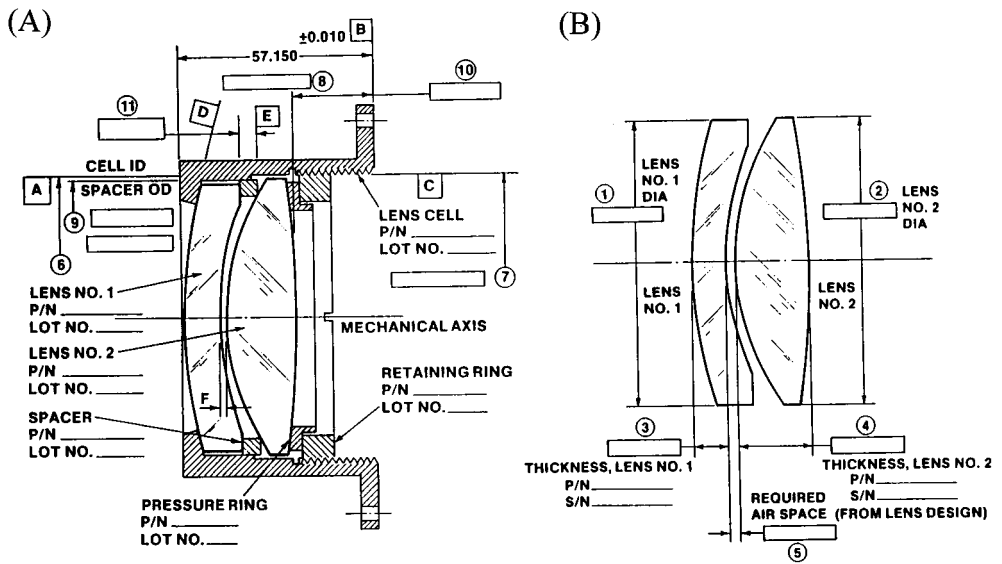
(A) Example of an optomechanical lens subassembly custom machined by the "lathe assembly" technique to fit a specific set of lens dimensions per (B). (From Yoder, P.R., Jr. 1993. *Optical Systems Engineering III*, SPIE Proc. Vol. 389, Taylor, W.H., ed., pp. 2–11.)
